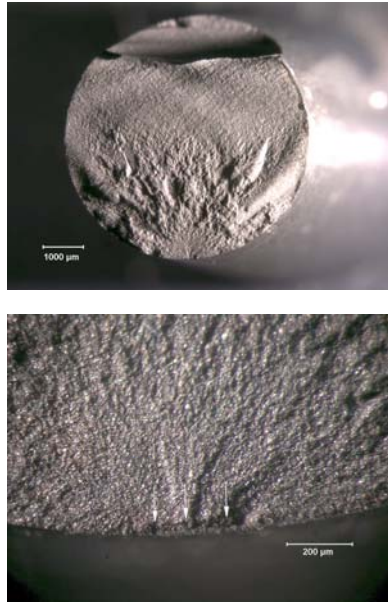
Fracture surface of a broken ceramic rod test specimen. The fracture origin is in the smooth semicircular region on the bottom of the figures. The origin is a “V-machining” crack (arrows in the lower figure) created when the rod was ground to final dimensions. Similar cracks can limit strength in components
